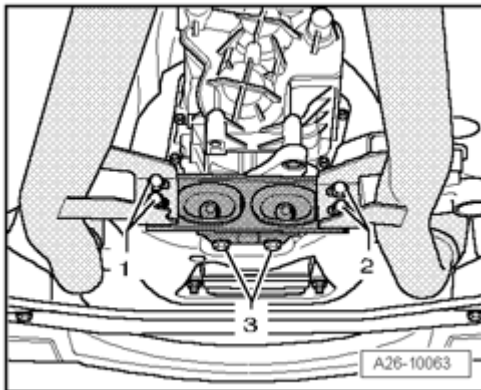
Removing/Installing Mounting Bolts For Front Exhaust Pipes
